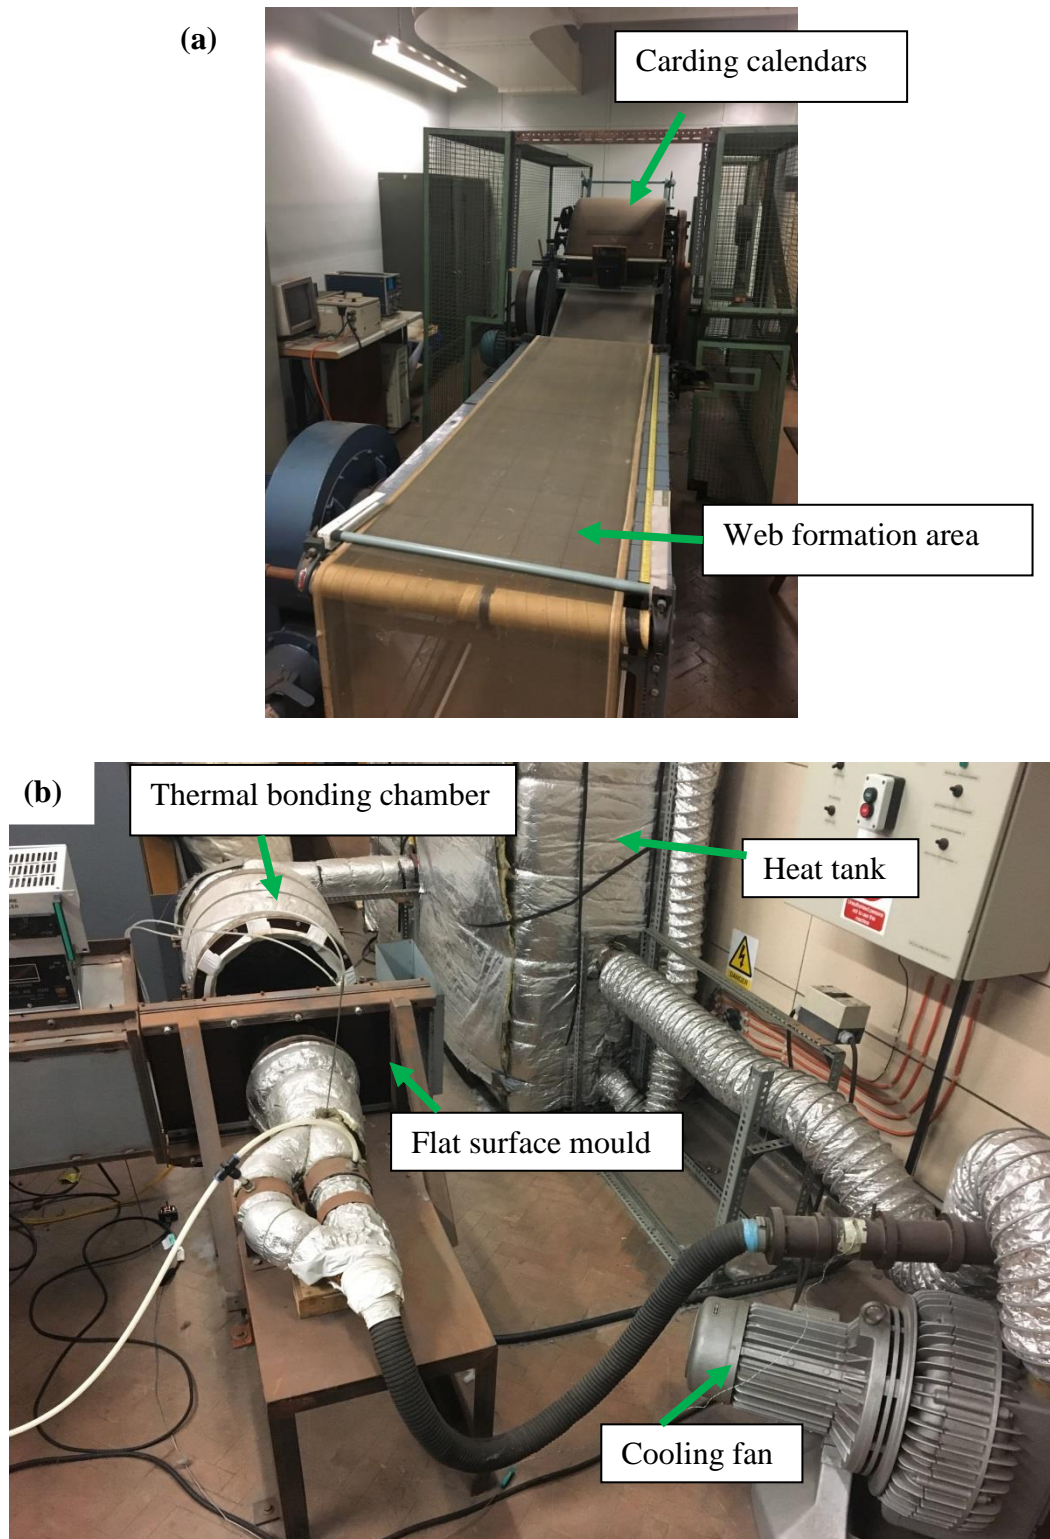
The (a) carding machine and (b) thermal bonding machine.
